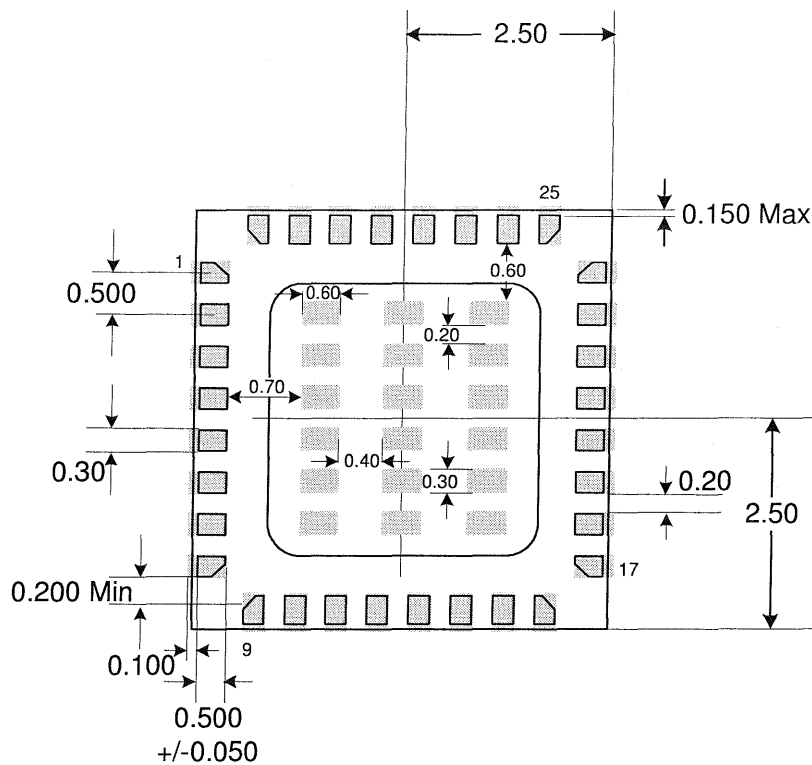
Typical Solder Paste Diagram for QFN-32 Package
